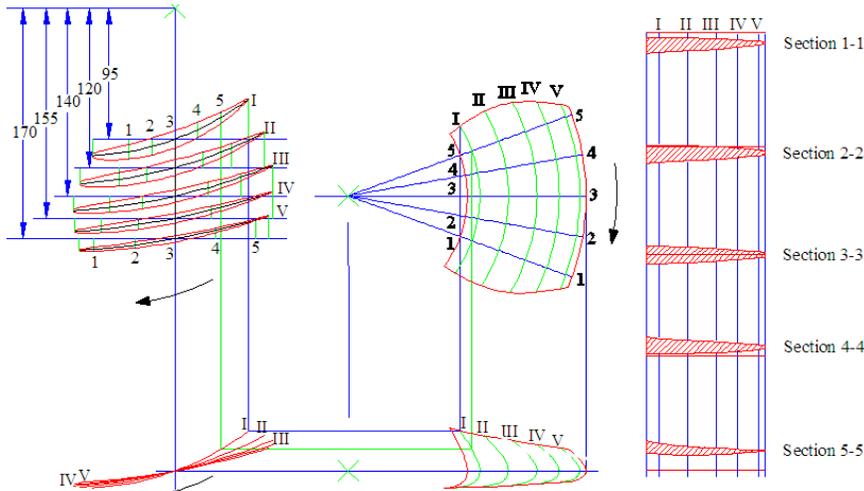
Two Dimensional View of Blade Profile for Impeller
